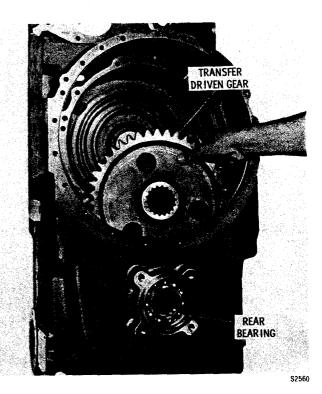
Removing transfer driven gear (-1 models with one-piece output shaft)
